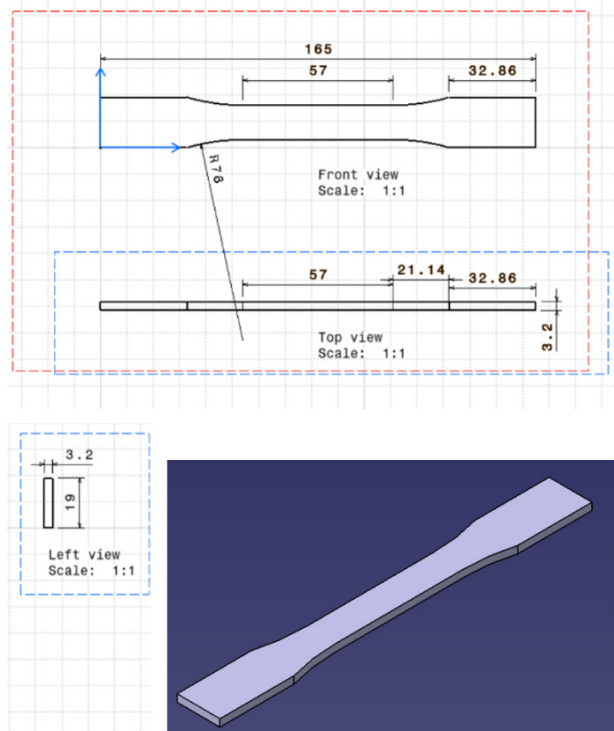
Schematic of the geometry and dimensions of the specimen according to the ASTM standard for high-cycle axial fatigue testing (dimensions are in mm)
